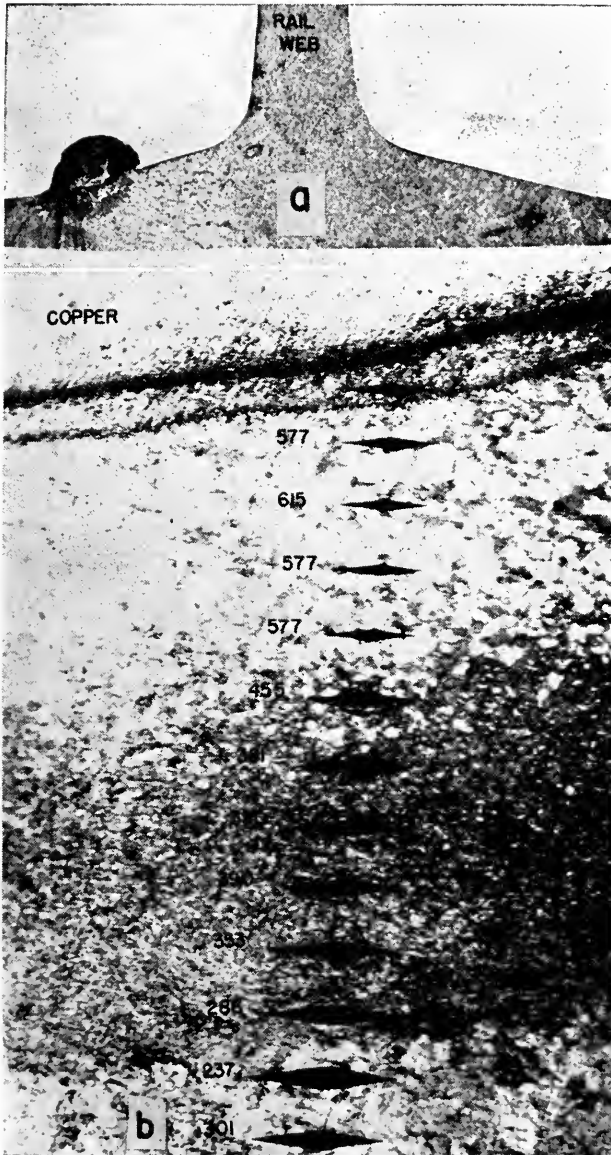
Bond weld on rail base caused rail failure.
